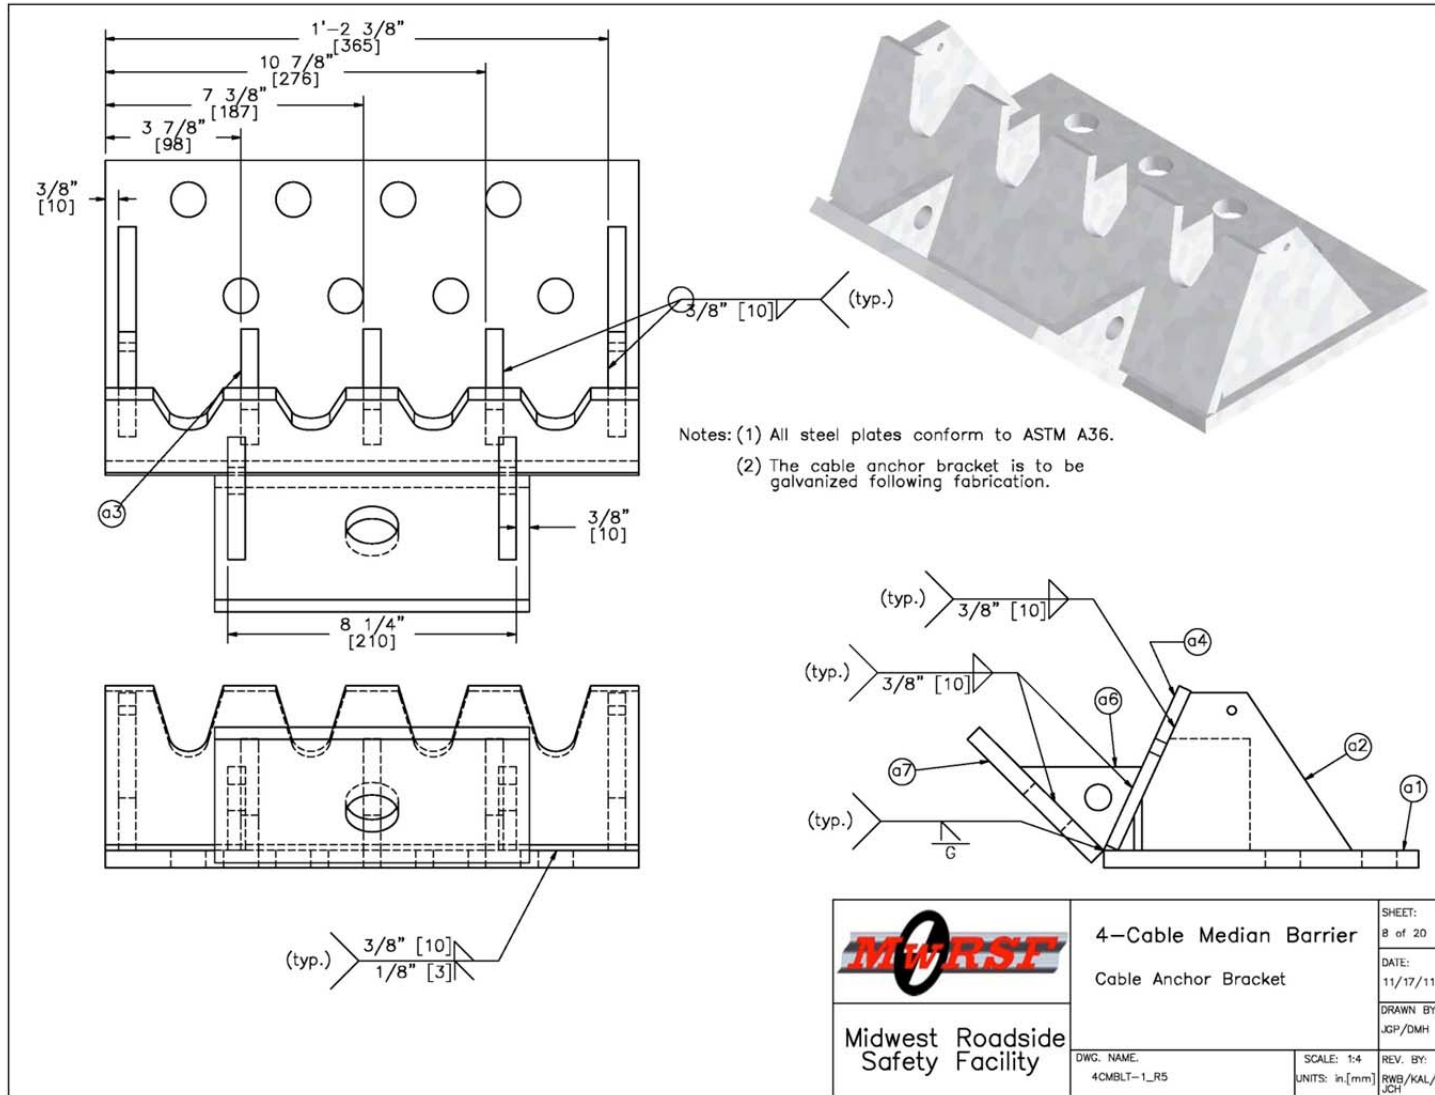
Anchor Bracket Details, Test No. 4CMBLT-1
